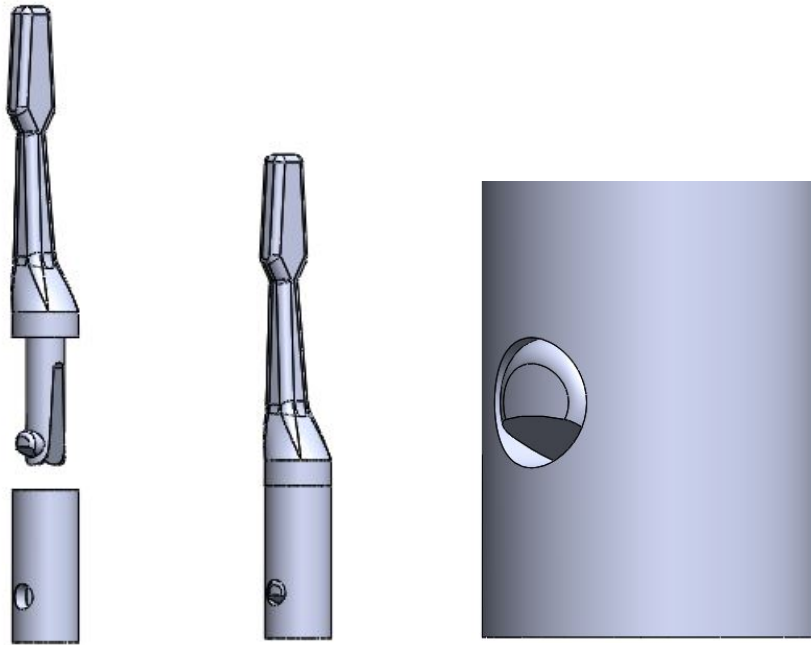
The cavity created in concept H when assembled if having chamfered extrusion on the leg.
